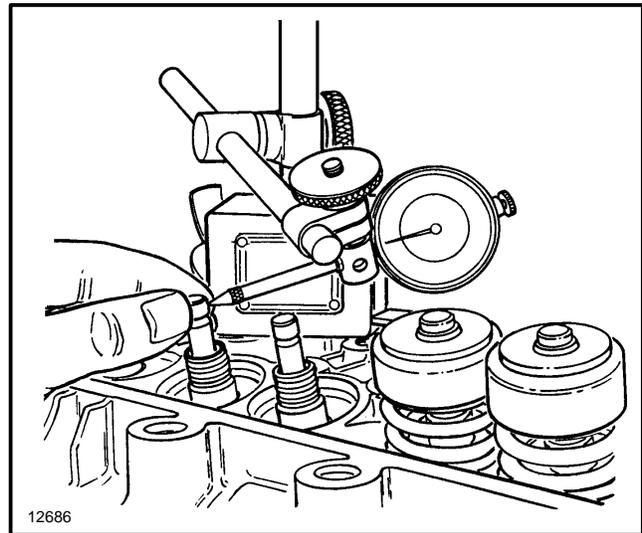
CHECK THE CLEARANCE BETWEEN VALVE GUIDE AND VALVE
